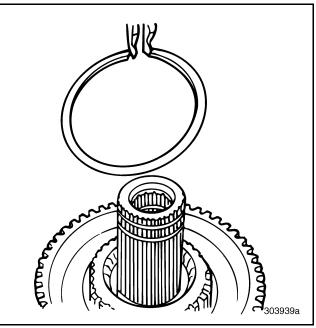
Removing Gear-to-Hub Snap Ring (T313L/T318L Shown)
